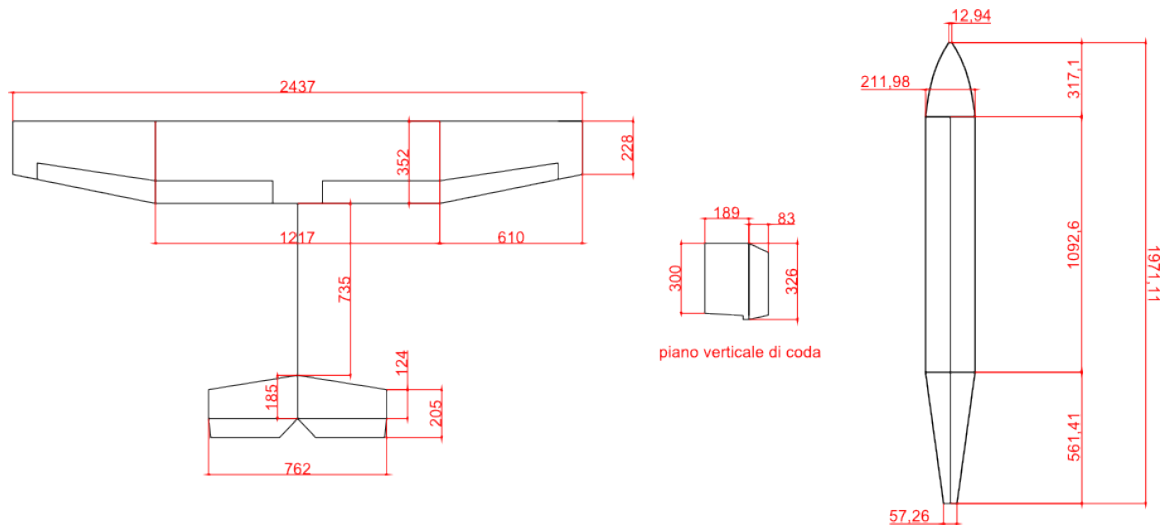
Reference drawings from 2D (dimensions in millimeters)
